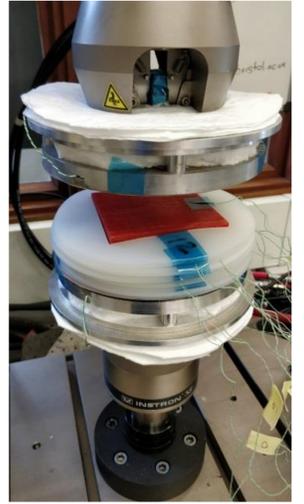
Whole LbL process implementation using a servo-hydraulic machine with heated plates.
